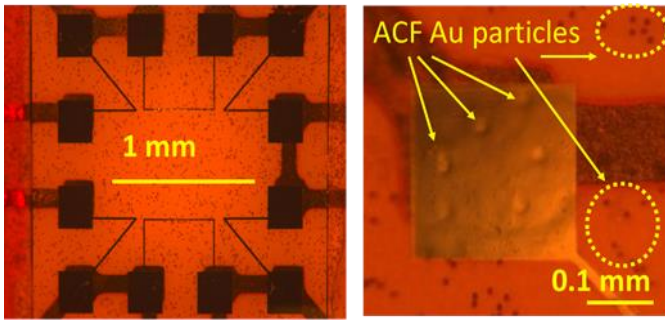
Top view: Zoom in on the ultra-thinned test die ACF FC after XeF2 process, bonded on PI PCB (left), zoom in on the die bond pad bonded to the landing pad on PI (right).
